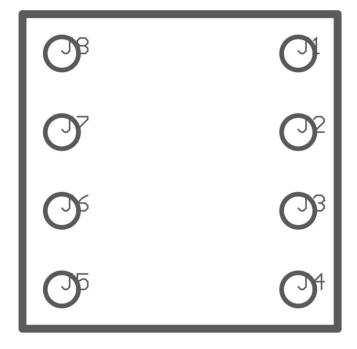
PCB Bottom-Layer Assembly Drawing
